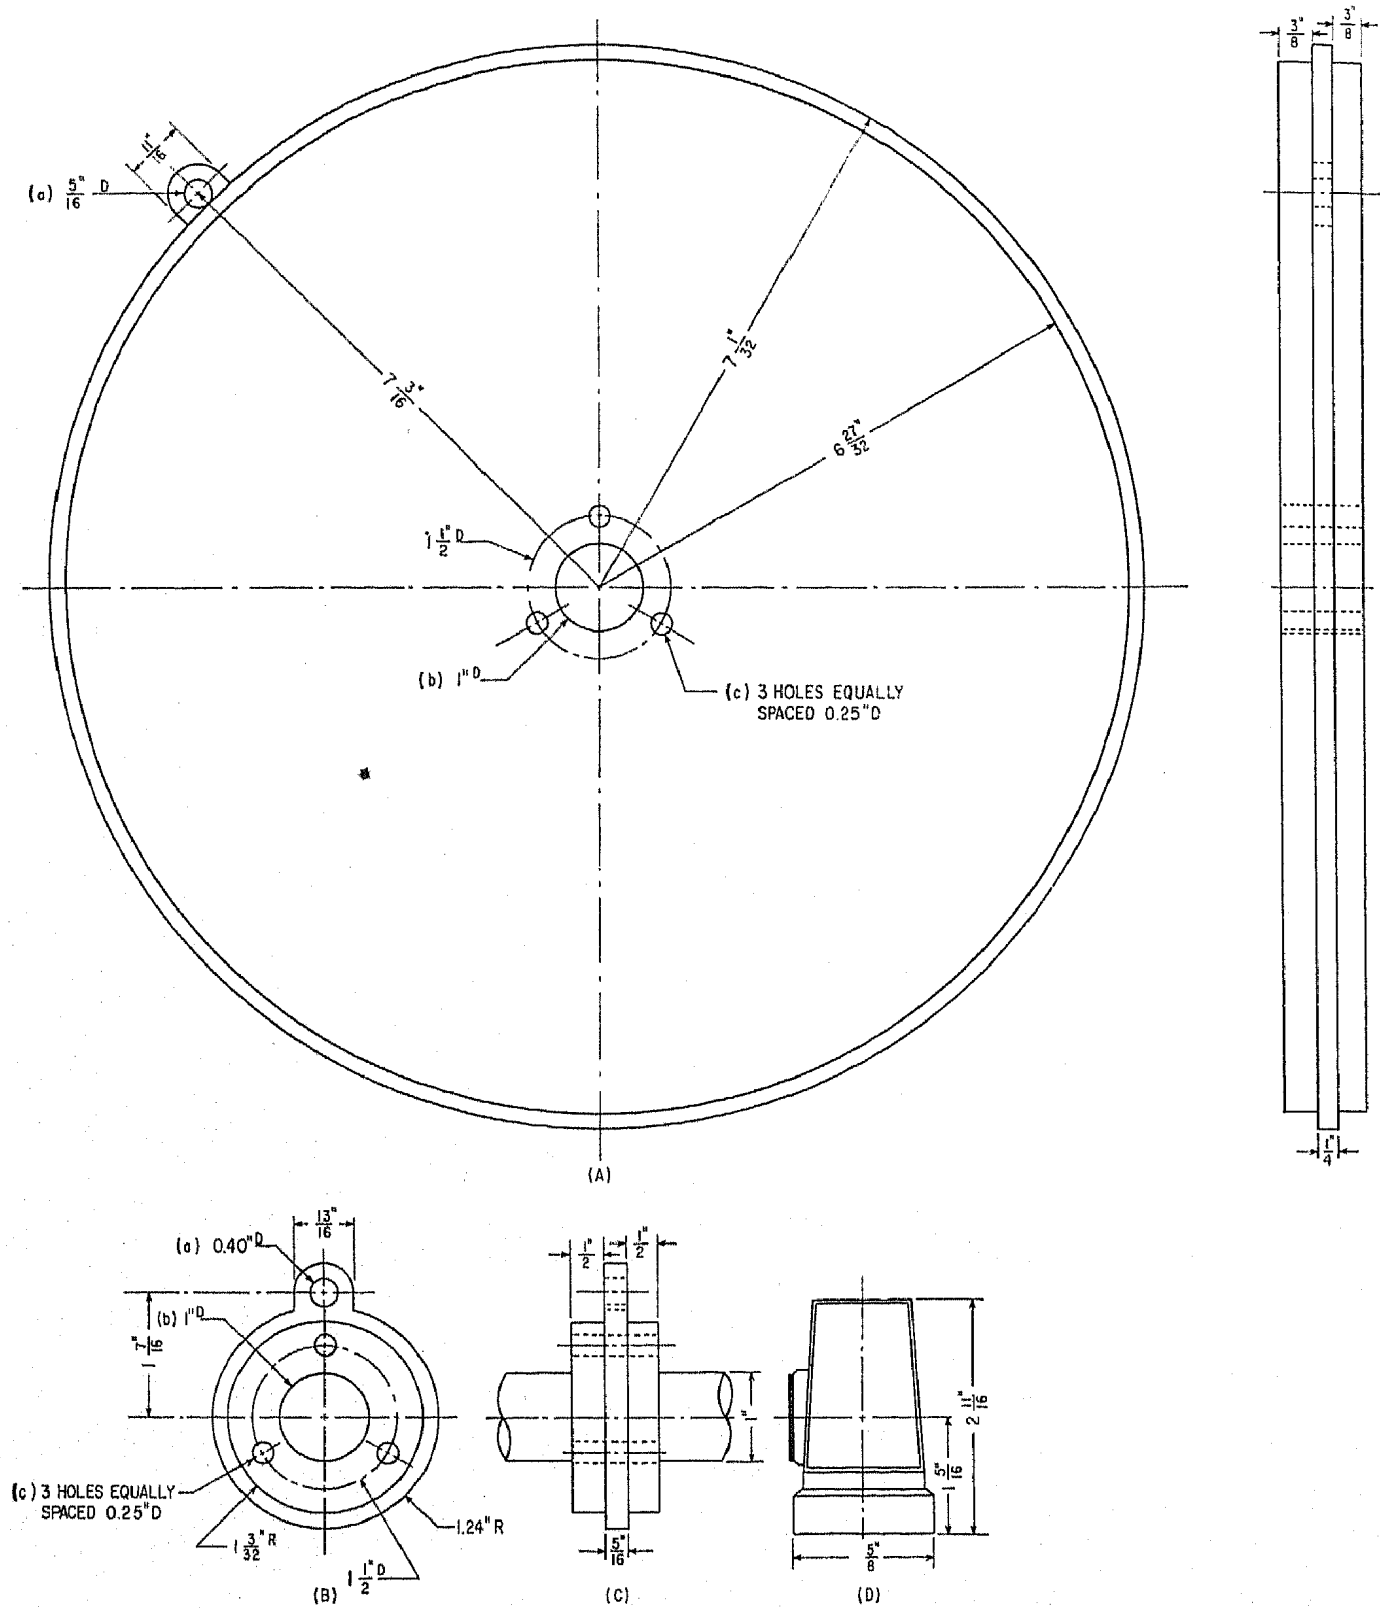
Design drawings for (A) constant-load wheel, (B) specimen loading wheel, (C) shaft assembly, and (D) ball bearing pillow block
